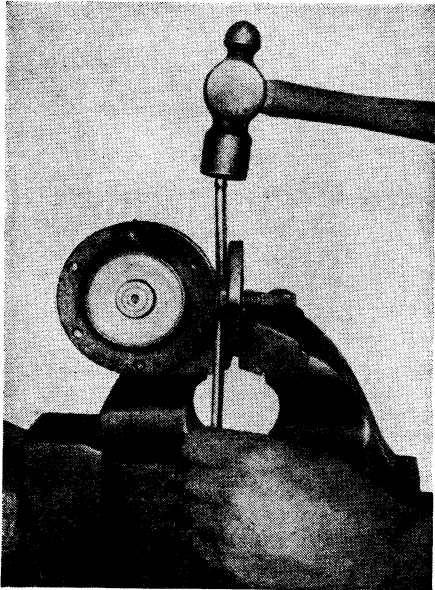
Series R. Driving assembly pin out of body with permanent rocker arm pin
